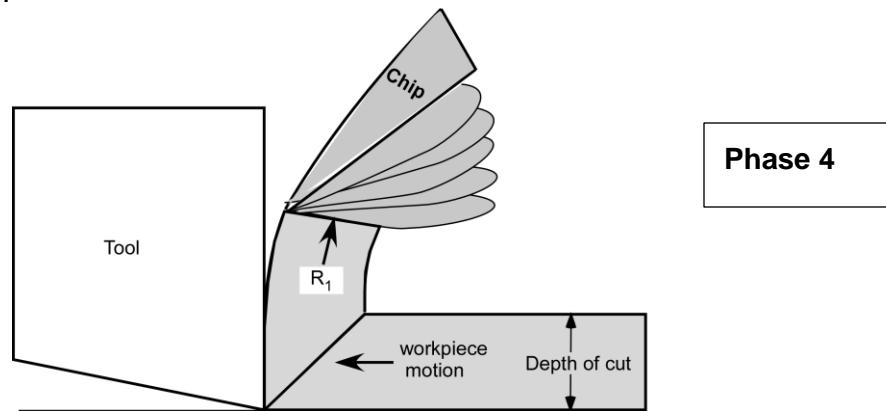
The Motion of the Incoming Workpiece Rotates and Ejects the Built-up Region and Starts a New Chip that Can Again Stick to the Tool and Start the Cycle Over Again. Depending on the Conditions, the Chip Can be Continuous for Some Time before Welding Again.
